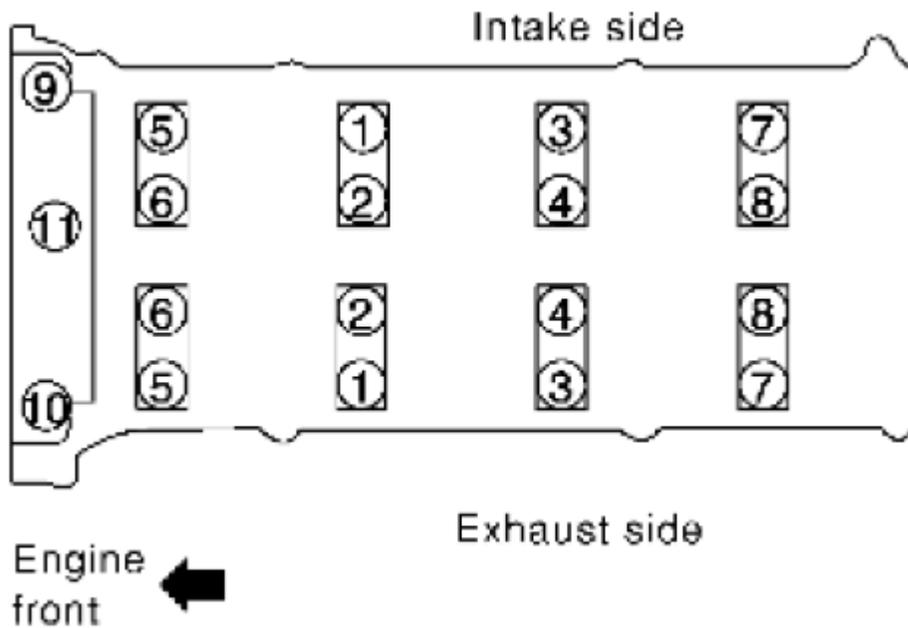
Tightening Order Of Camshaft Brackets Bolt
